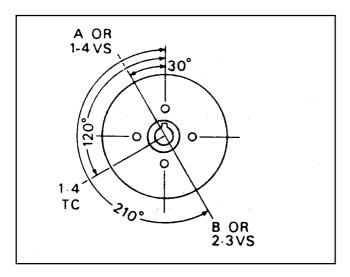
N-495/NT-495 Engine Accessory drive pulley markings
